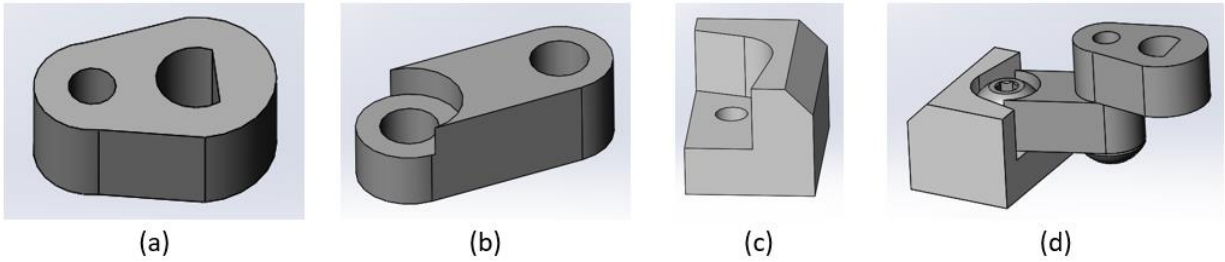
Shapes of (a) drive link, (b) connecting link, and (c) push link used in final design of prototype. (d) shows how the parts are joined and interact in assembly. The mechanism is driven by a motor at the D-shaped hole in the drive link. Linkages are secured by screws and rotate freely.
